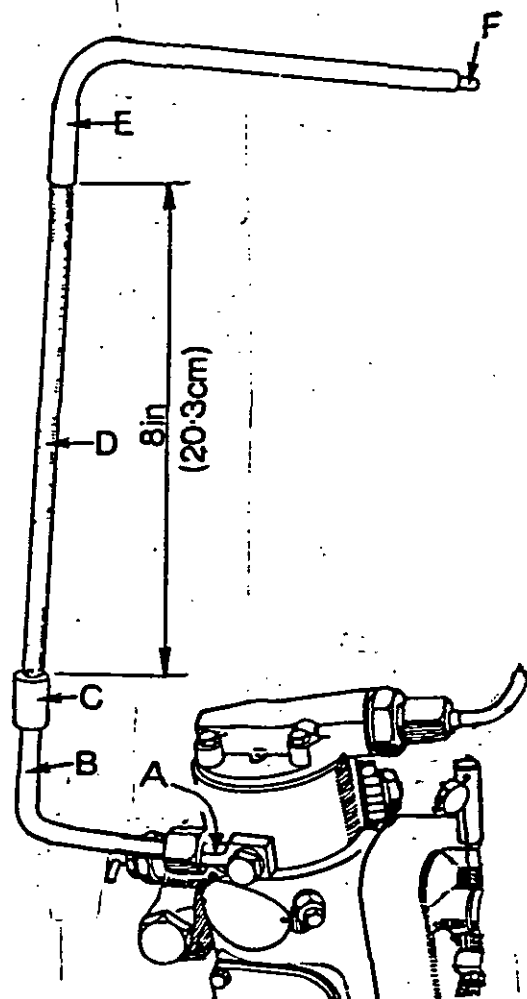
EQUIPMENT FOR SPILL TIMING
